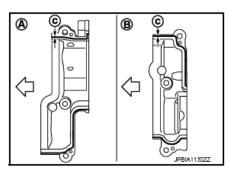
Identifying Liquid Gasket Applying Dimension Of Actuator Bracket (Rear) Courtesy of NISSAN MOTOR CO., U.S.A.
